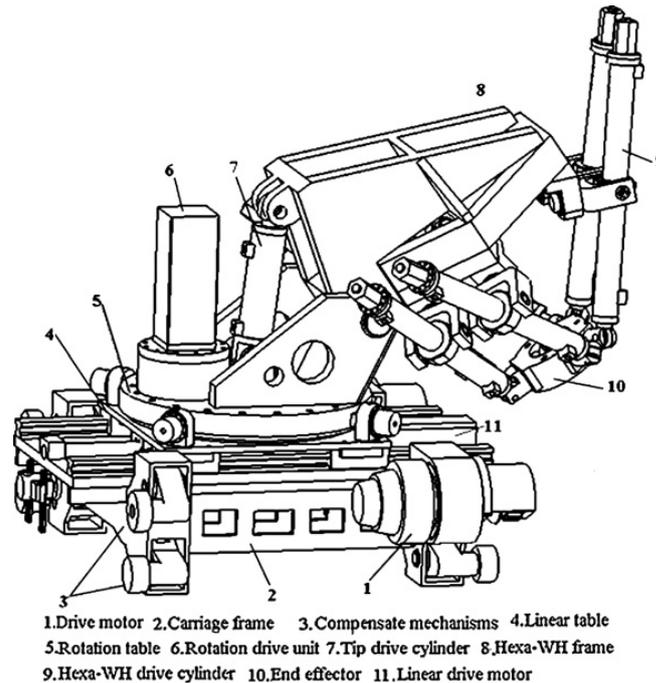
Intersector Welding Robot (IWR) (Pessi et al)
